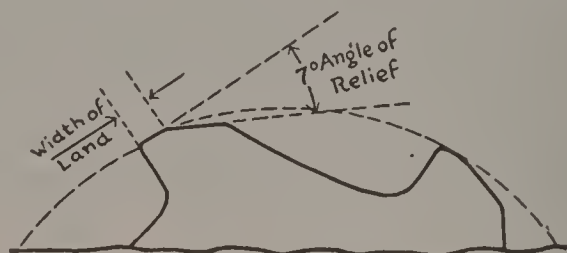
SECTION OF SOLID REAMER AFTER GRINDING CLEARANCE ON BLADE
